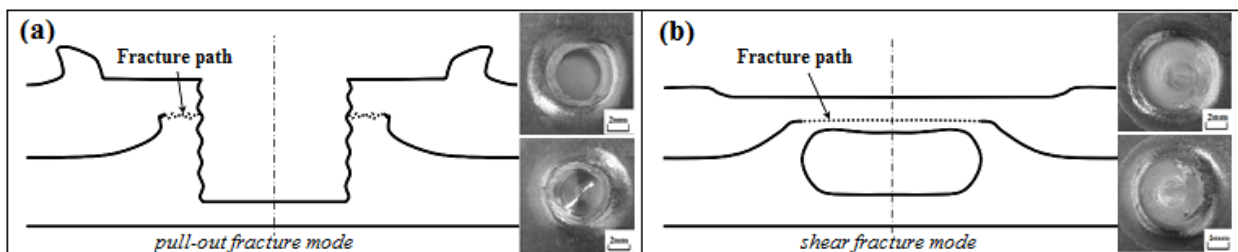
Schematic illustration of fracture path (the loading direction is horizontal direction): (a) in CFSSW welded sample; (b) in RFSSW sample [72]
